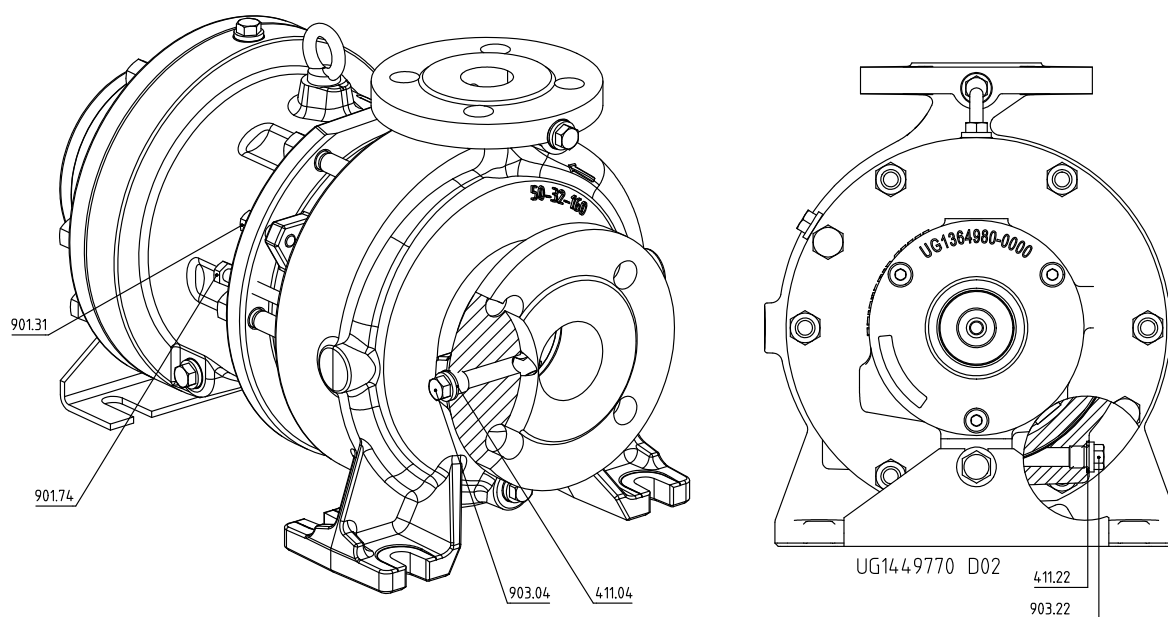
Mounting of discharge cover on the pump casing of version with clamped cover
